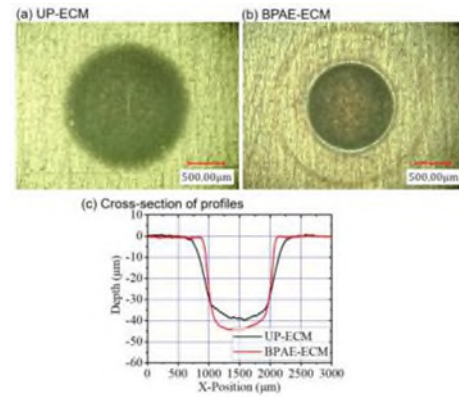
The holes machined by UP-ECM and BPAE-ECM.
